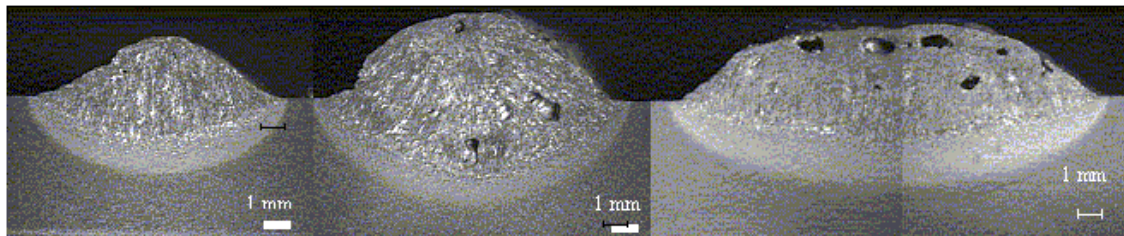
Macrographs of the best welds created at 50 m using the three electrodes.
